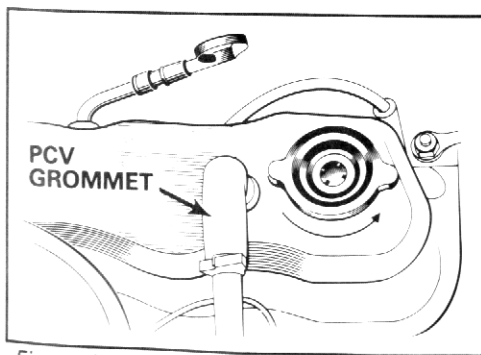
Top of engine (PCV valve is inside grommet), 4-cylinder
